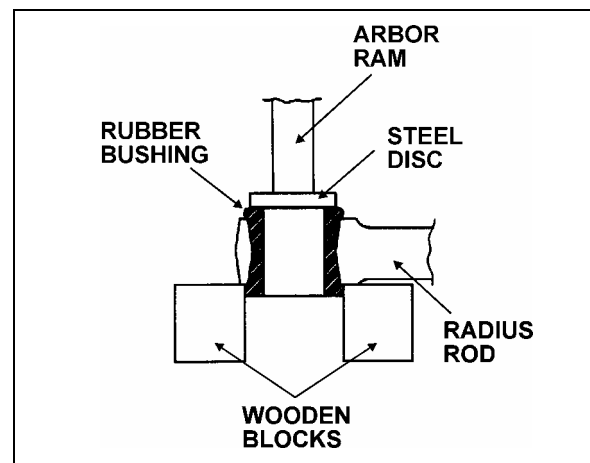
RADIUS ROD BUSHING REMOVAL 16011
